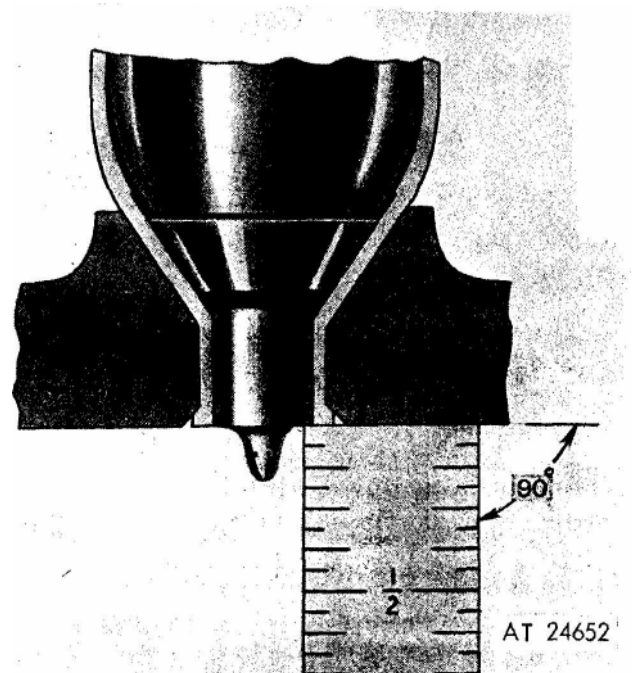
Checking location of injector spray tip relative to lower surface of cylinder head.
